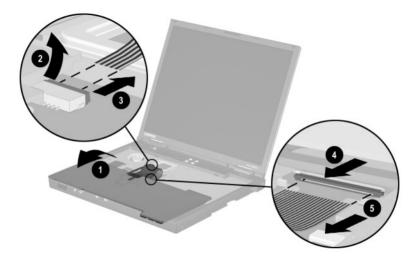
Disconnecting the Pointing Device and Keyboard Cables
